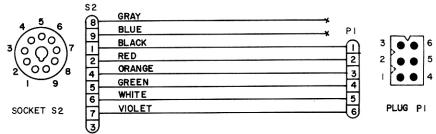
042648 Console Connector Extension (Plug and Socket Viewed from Wire End)
